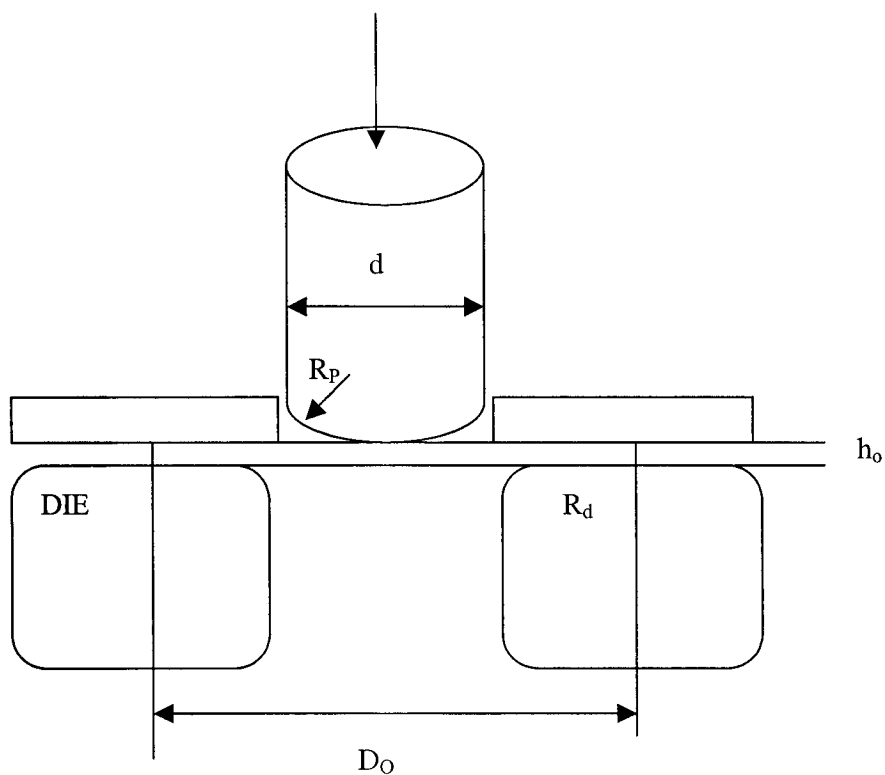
Arrangement of the Punch and bottom Die in Deep Drawing
